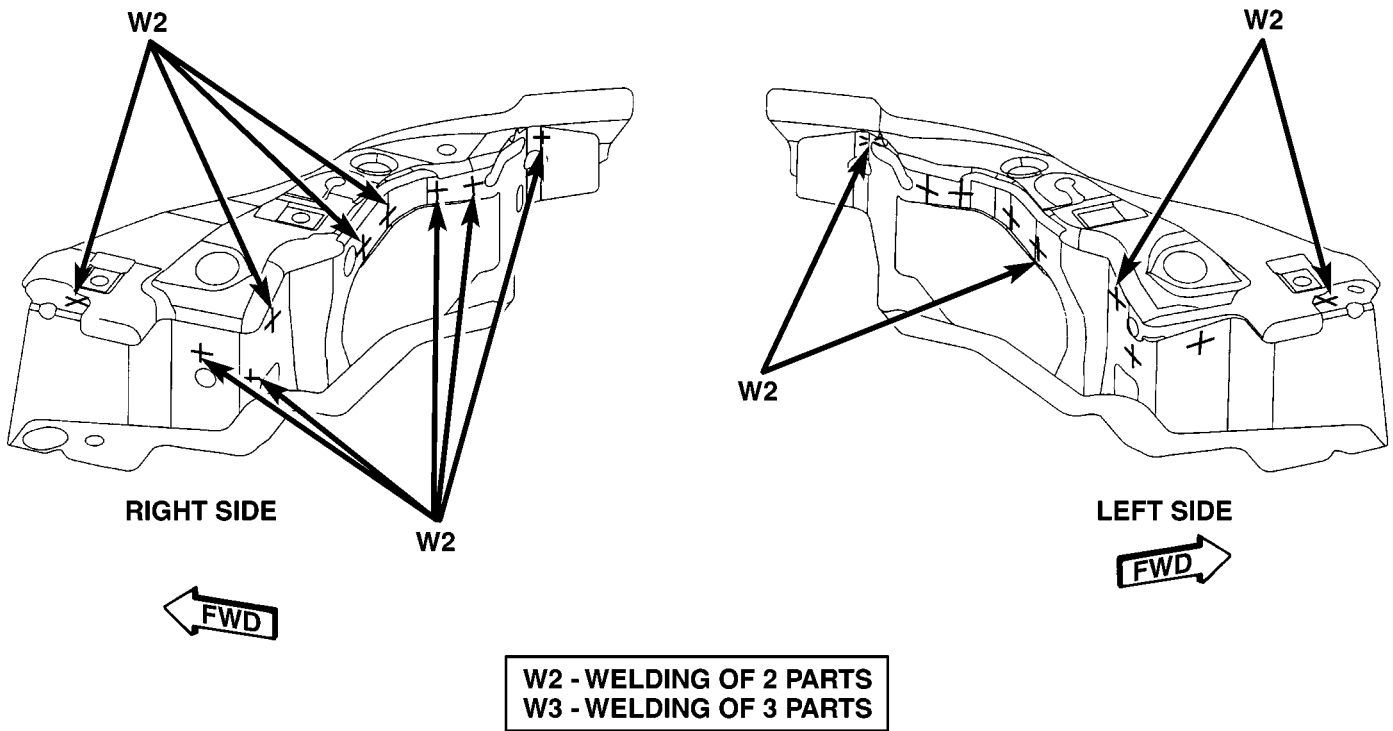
HEADLAMP MOUNTING REINFORCEMENT TO HEADLAMP MOUNTING PANEL
